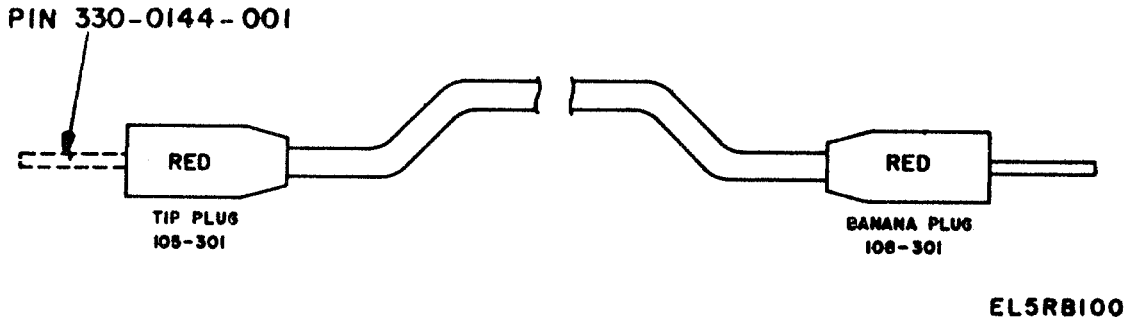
Test Lead PEN-SK-006, Assembly Drawing
